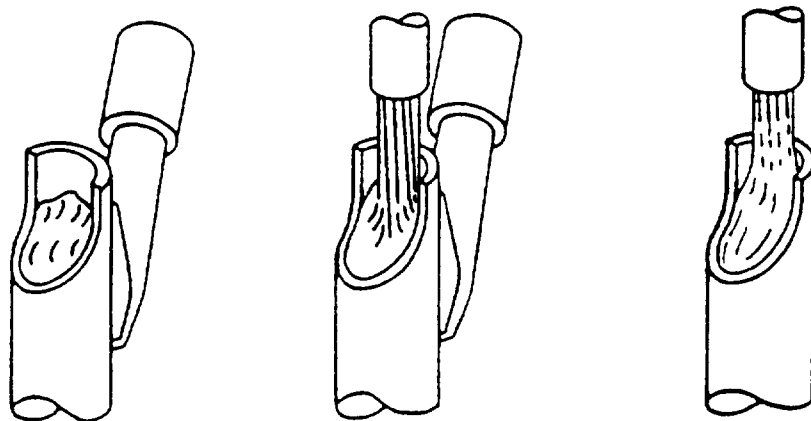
Soldering of hollow cylindrical connections (see 8.2.10).
